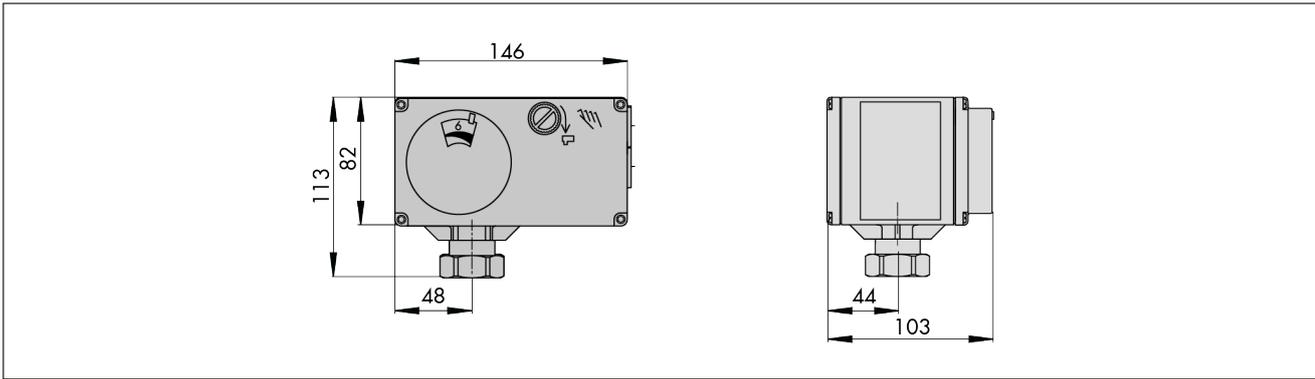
Dimensions in mm · TROVIS 5724-310/-320, TROVIS 5725-310/-320
